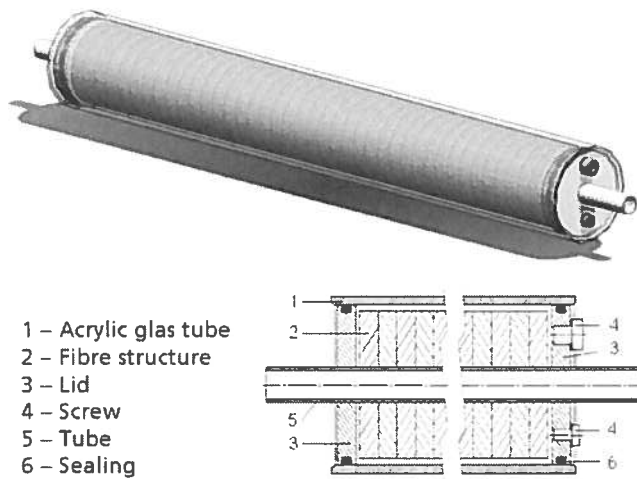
Technical drawing of basic latent heat storage module (Fraunhofer IFAM Dresden).
